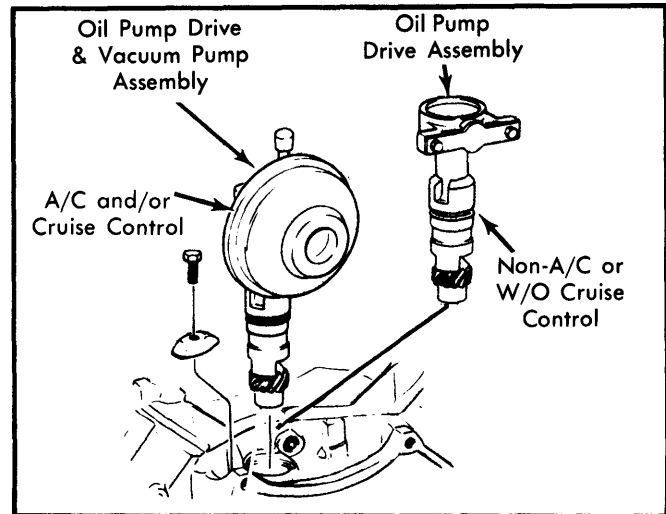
Vacuum Pump/Oil Pump & Oil Pump Drive Units
